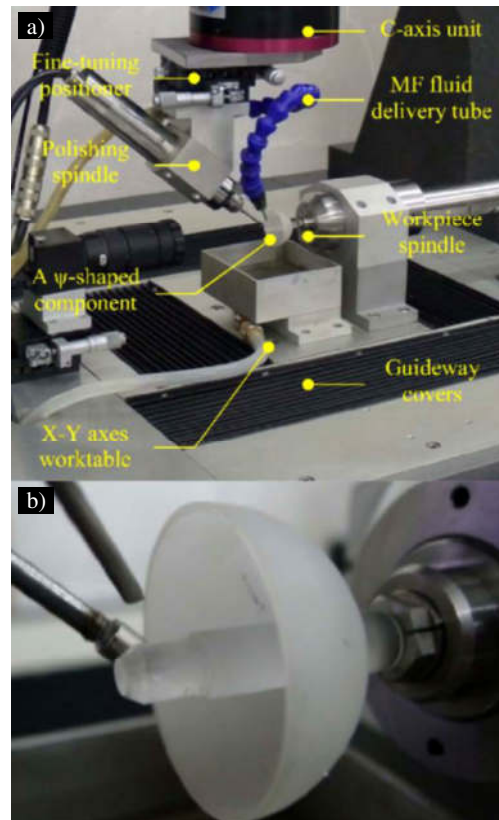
The MRF machine tool with ball-end permanent-magnet polishing head: a) general overview, b) ψ -shaped small bore component [32]
